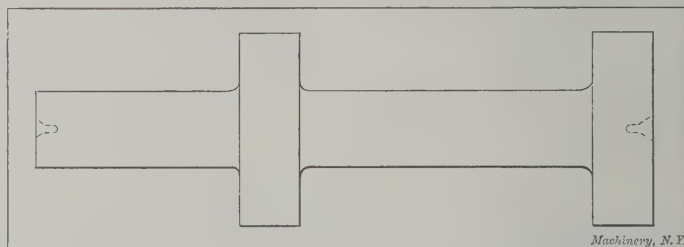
Test Piece used to set Grinder Table Straight, prior to Internal Grinding
